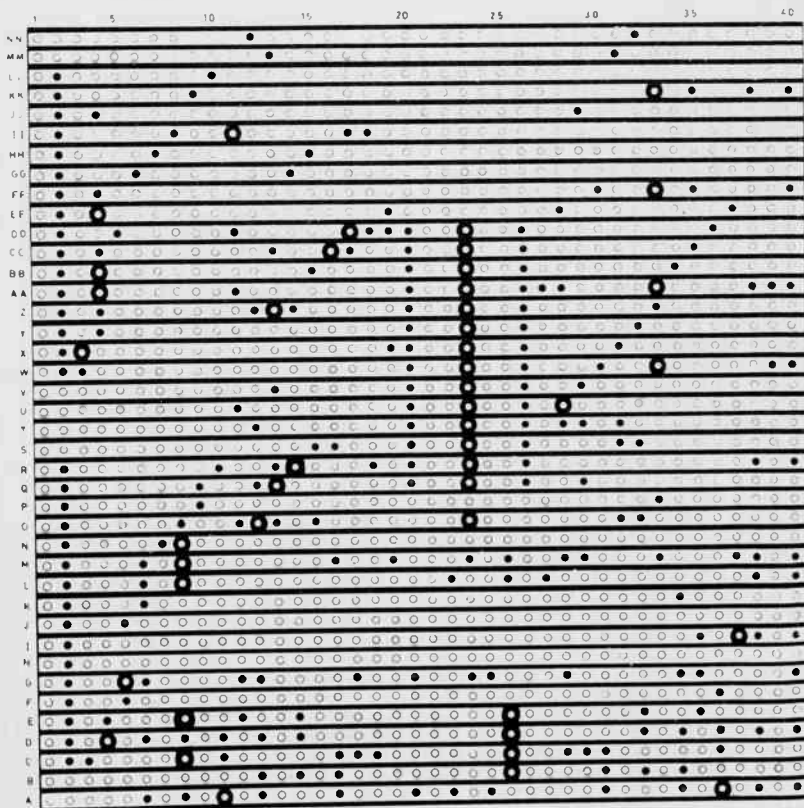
The circuit board component layout and details of breaks to be made in the underside of the board.
